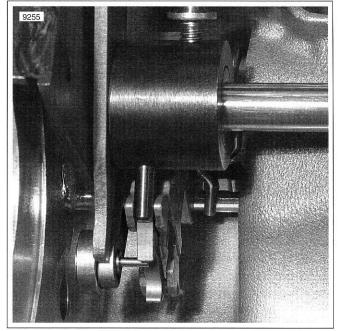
Shift Mechanism/Detent Retractor (HD-45339)
